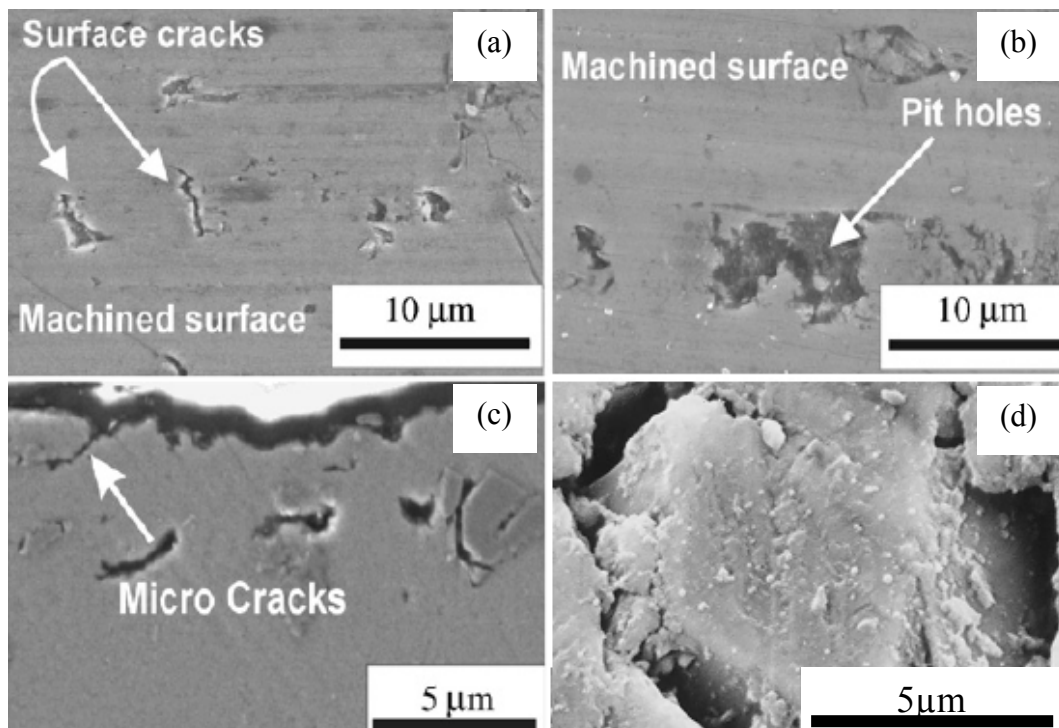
SEM images of Al MMC machined surface showing (a) cracks, (b) pits, (c) micro cracks and (d) fracture/crushed SiC particle [33, 202]
